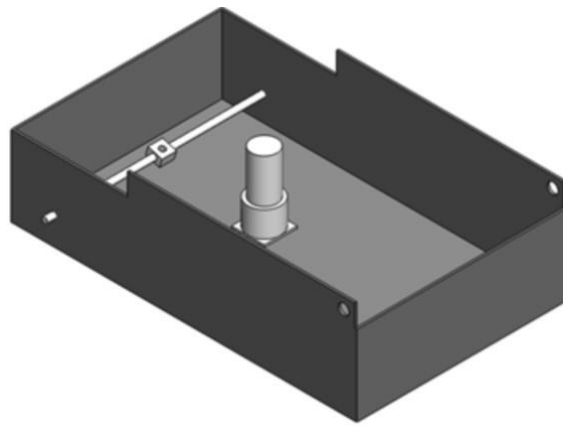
Upper body azimuth motor and vertical drive shaft bearing added.
